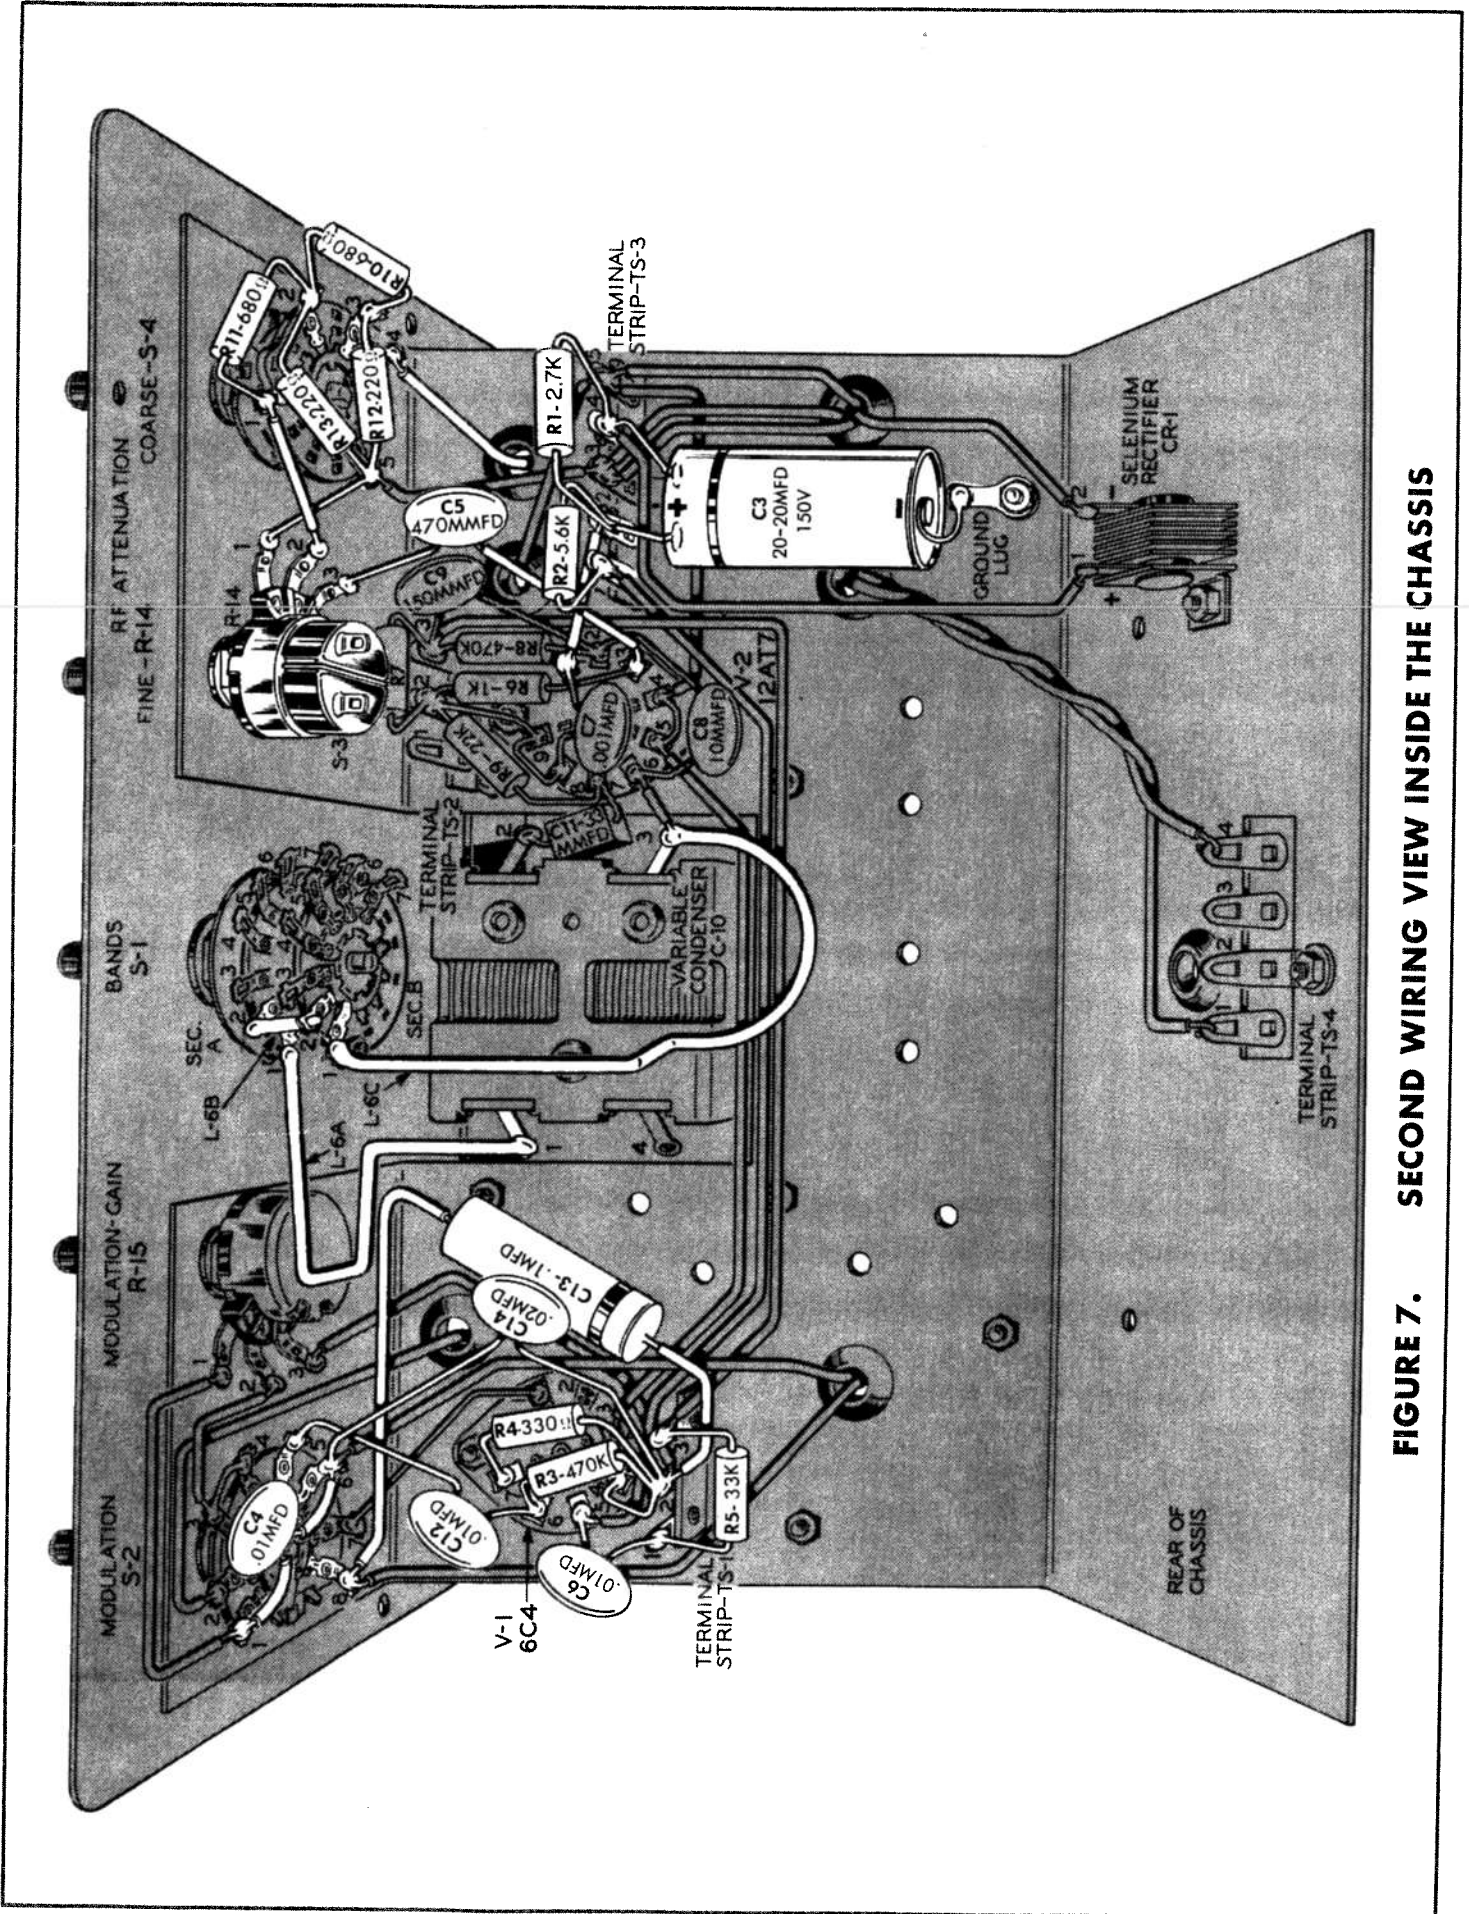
SECOND WIRING VIEW INSIDE THE CHASSIS
